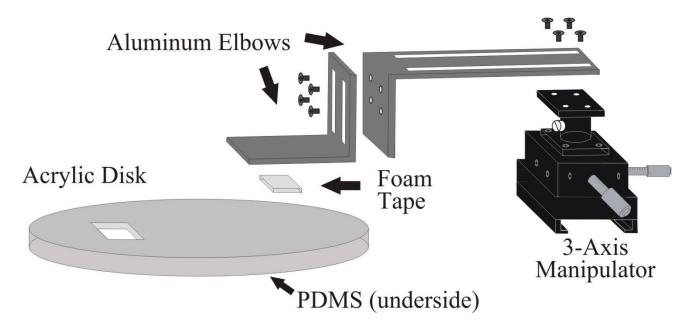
Exploded schematic view of the microscope stage components for mounting the pallet arrays.
